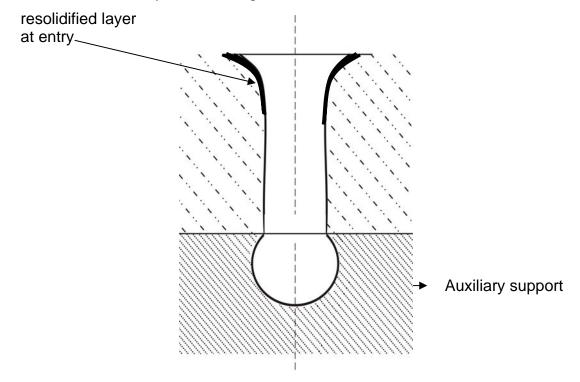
Typical kerf shape of electron beam drilled hole
